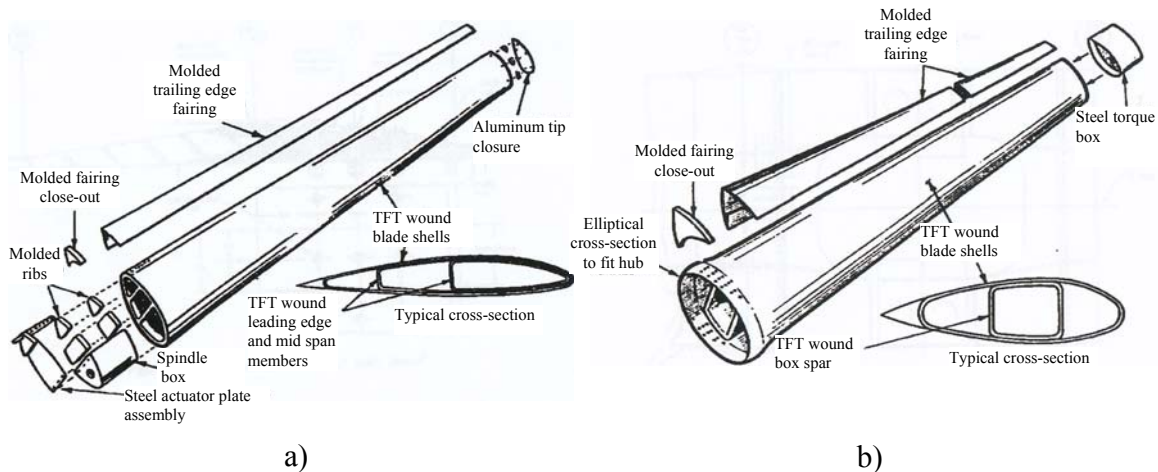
MOD-2 composite blade preliminary design construction details [16]. a) blade tip assembly, b) inner blade assembly.
